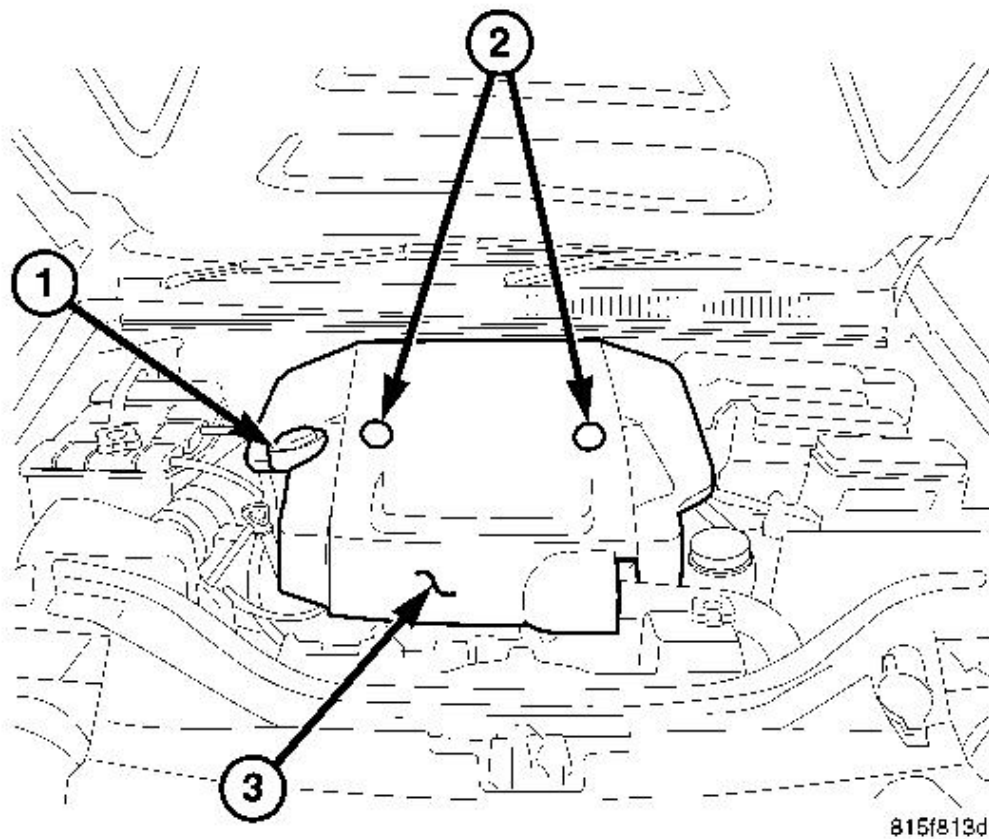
Oil Filler Cap, Cover Fasteners & Engine Cover
